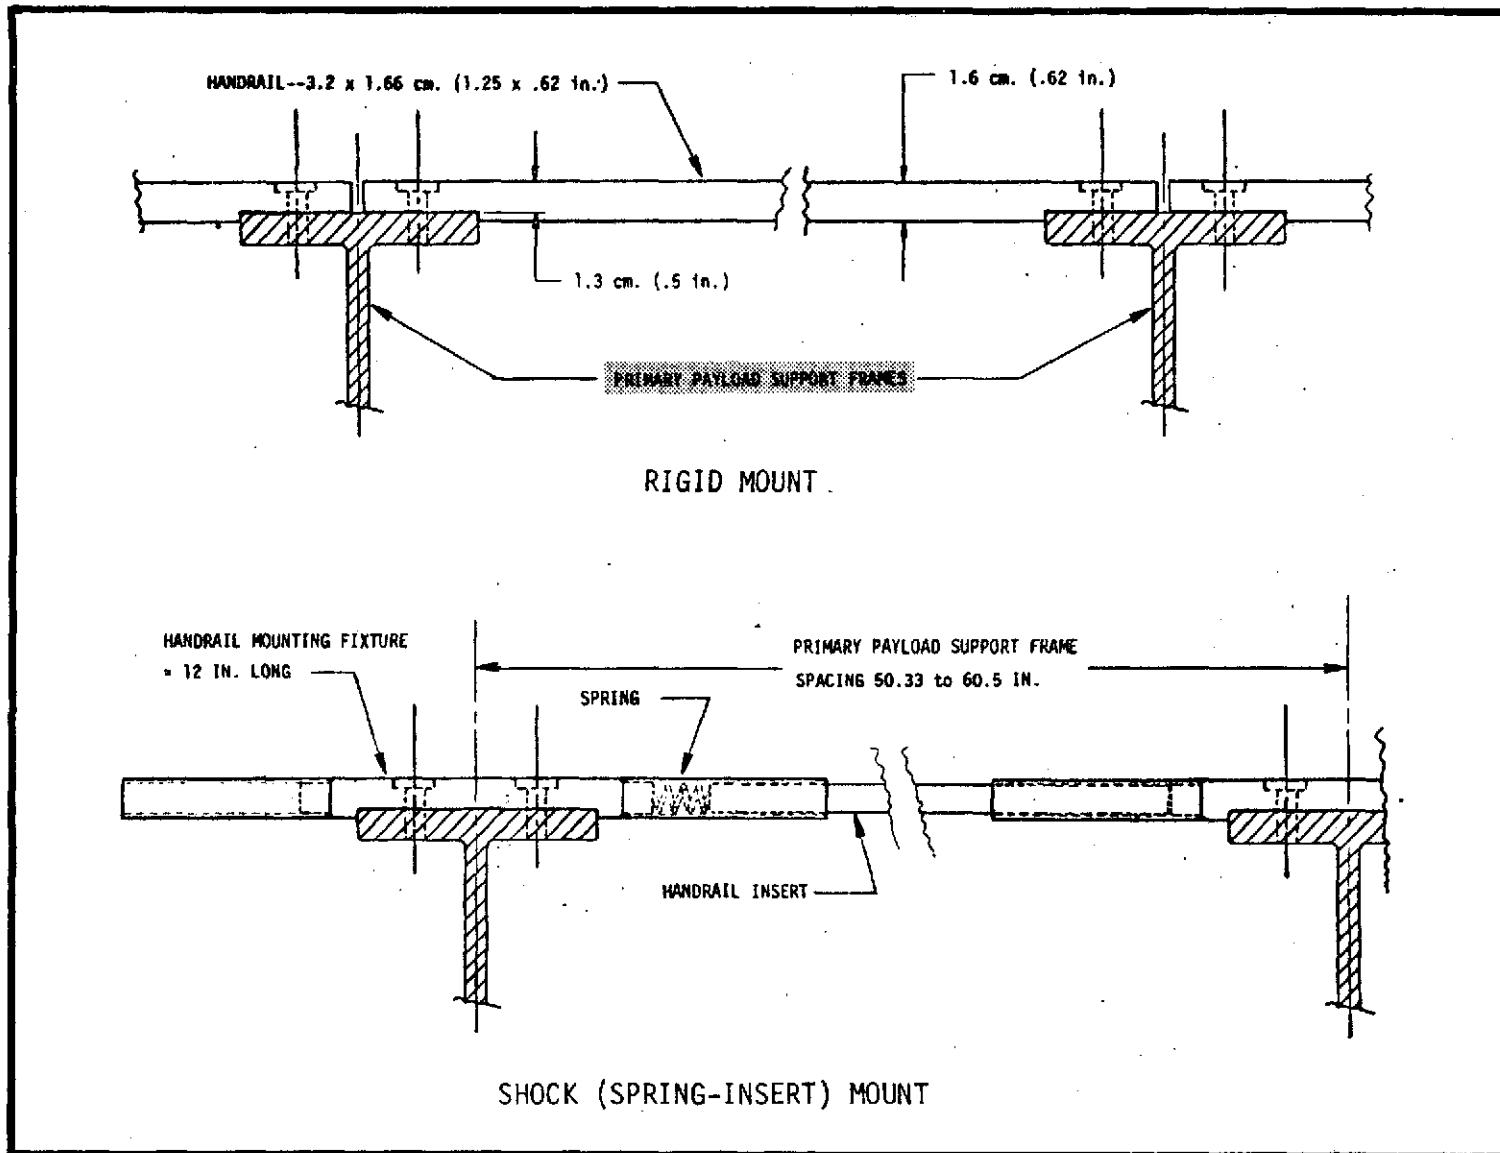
Typical (Under Payload) Handrail Mounting Concepts
